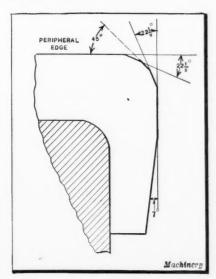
Outline to which Inserted Blades of Face Milling Cutters are sometimes ground
